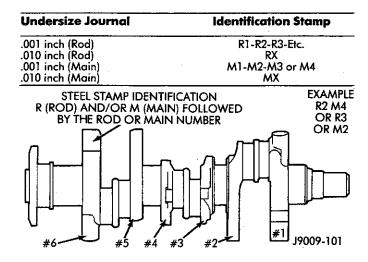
Location of Crankshaft Identification on No. 6 Counterweight
